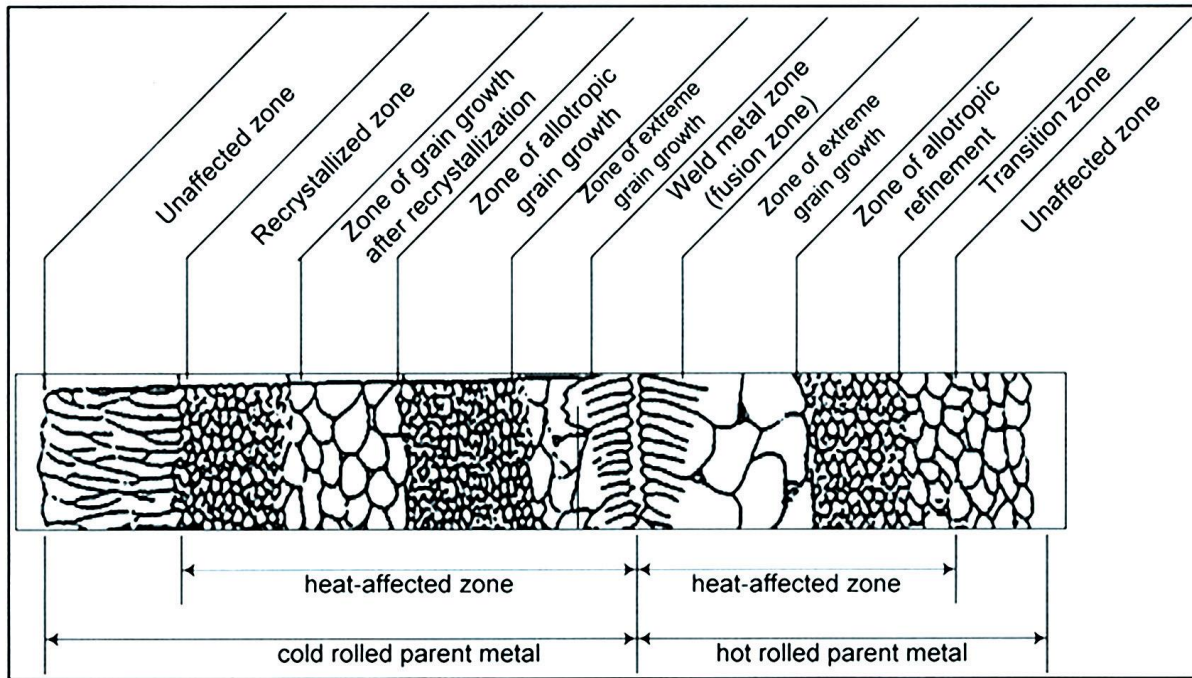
A micro-structured draw for main regions of a weld zone.
